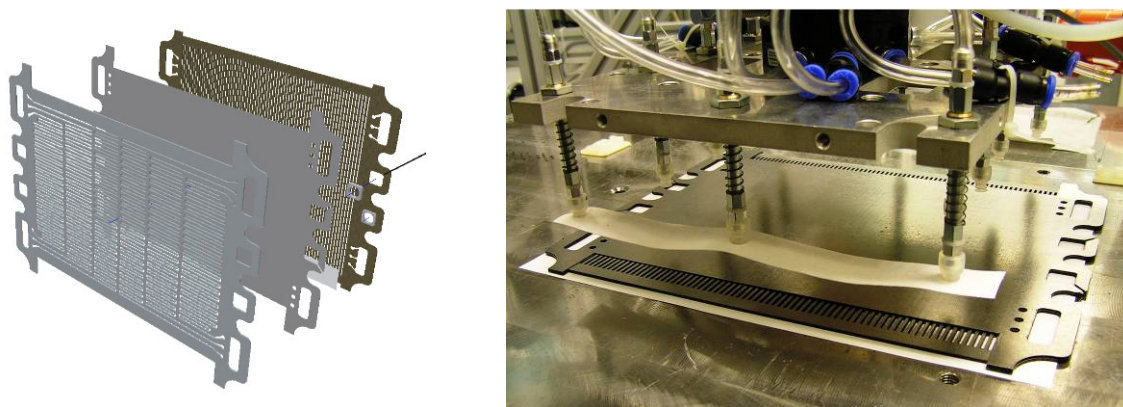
Bipolar unit setup and robot assisted assembly of wick.
